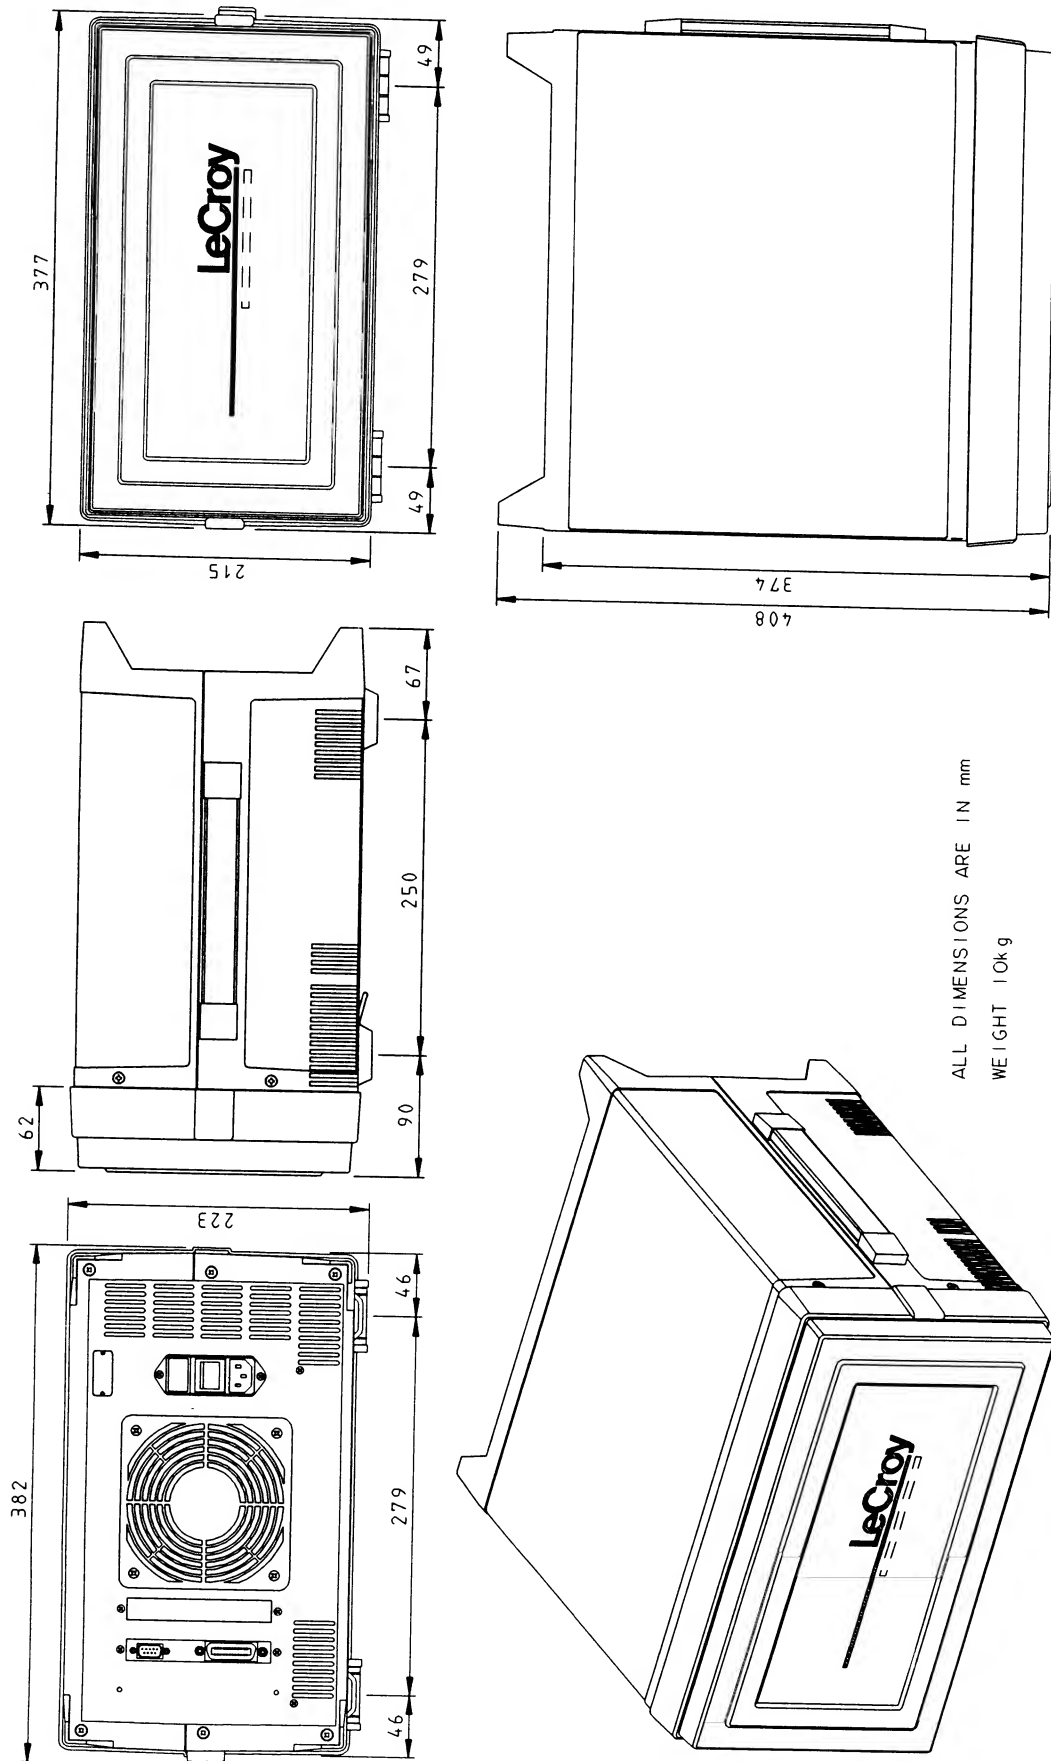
9320 DSO DIMENSIONS WITH PROTECTIVE COVER
